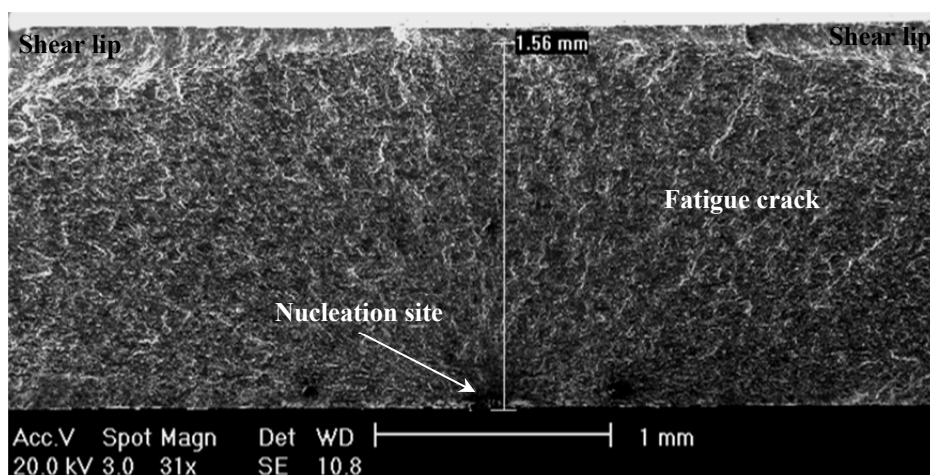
Semi-elliptical crack front in T-U-0-0 fracture surface
